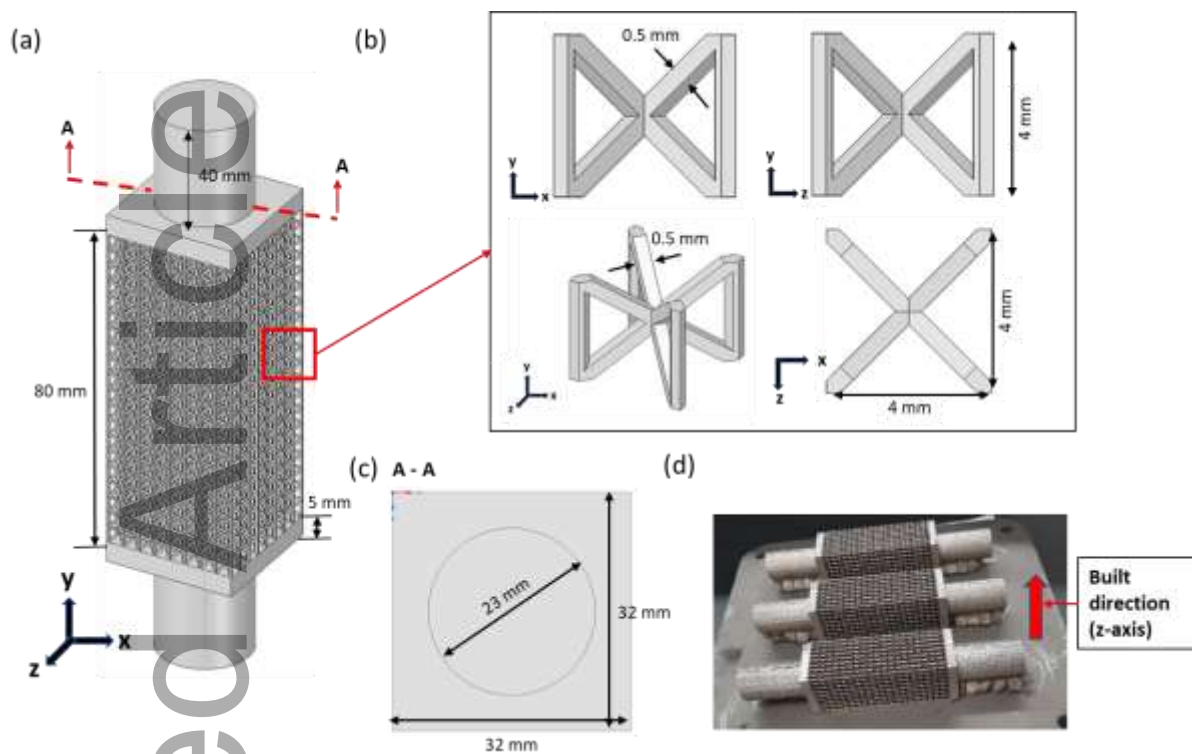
(a) CAD geometry of a BCCZ metamaterial with dimensions, (b) unit cell dimension of a BCCZ cell, (c) specimen clamp geometry dimensions, and (d) as-built specimens showing built direction with building plate.
